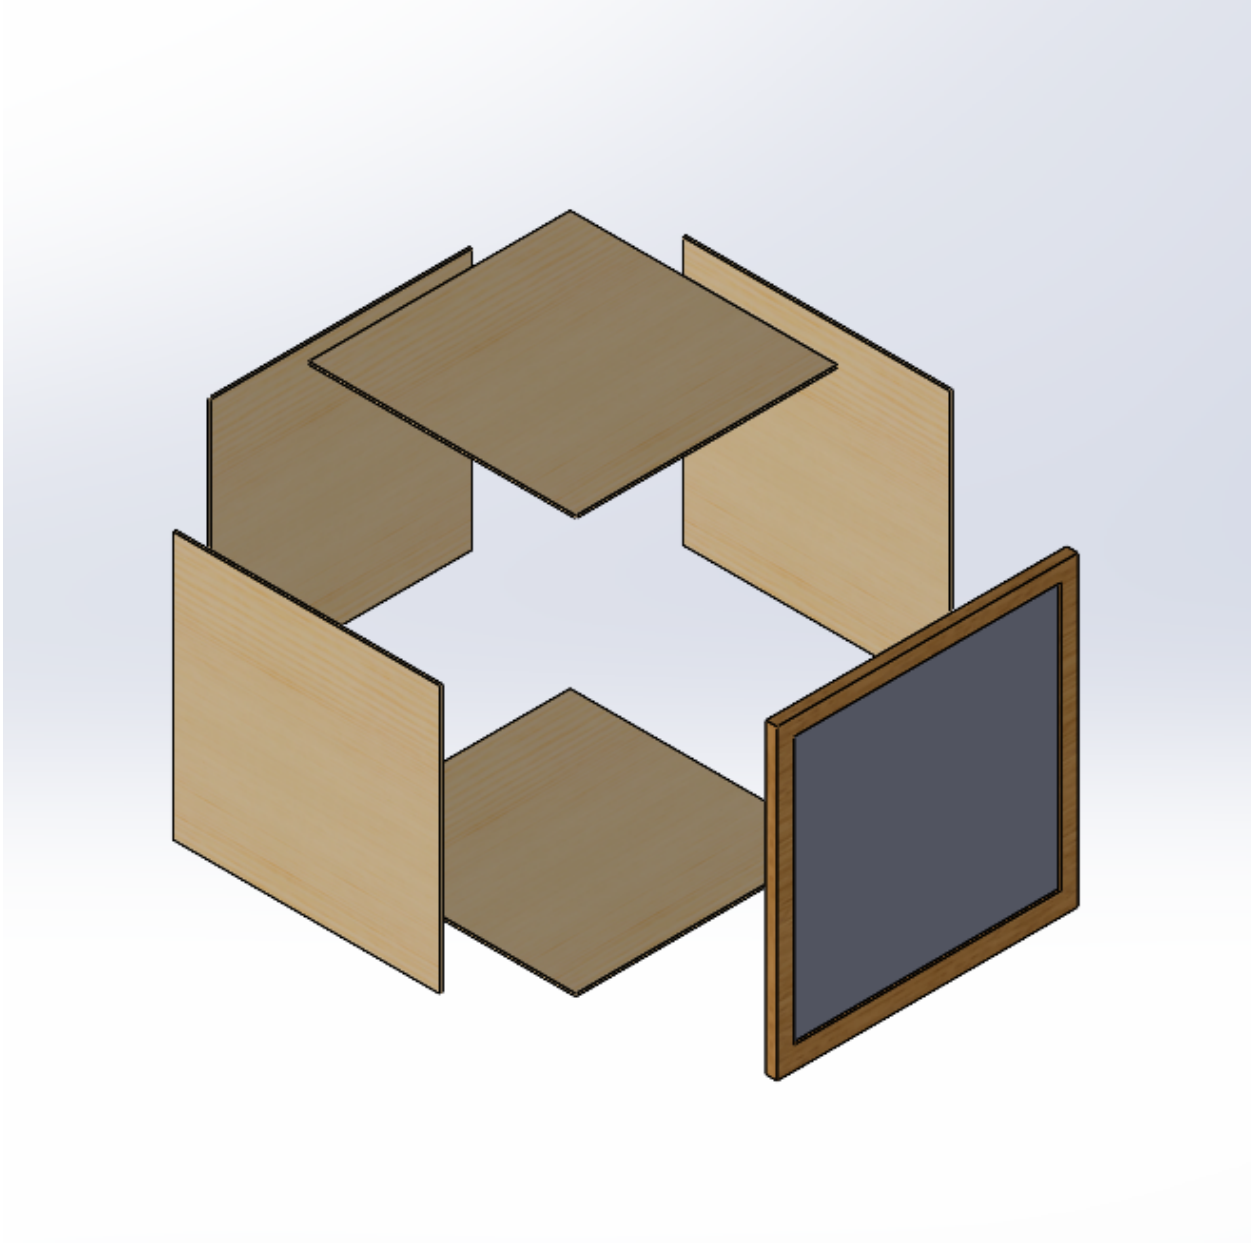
, Exploded View of Single Layered (Uninsulated) Model Testing Environment
